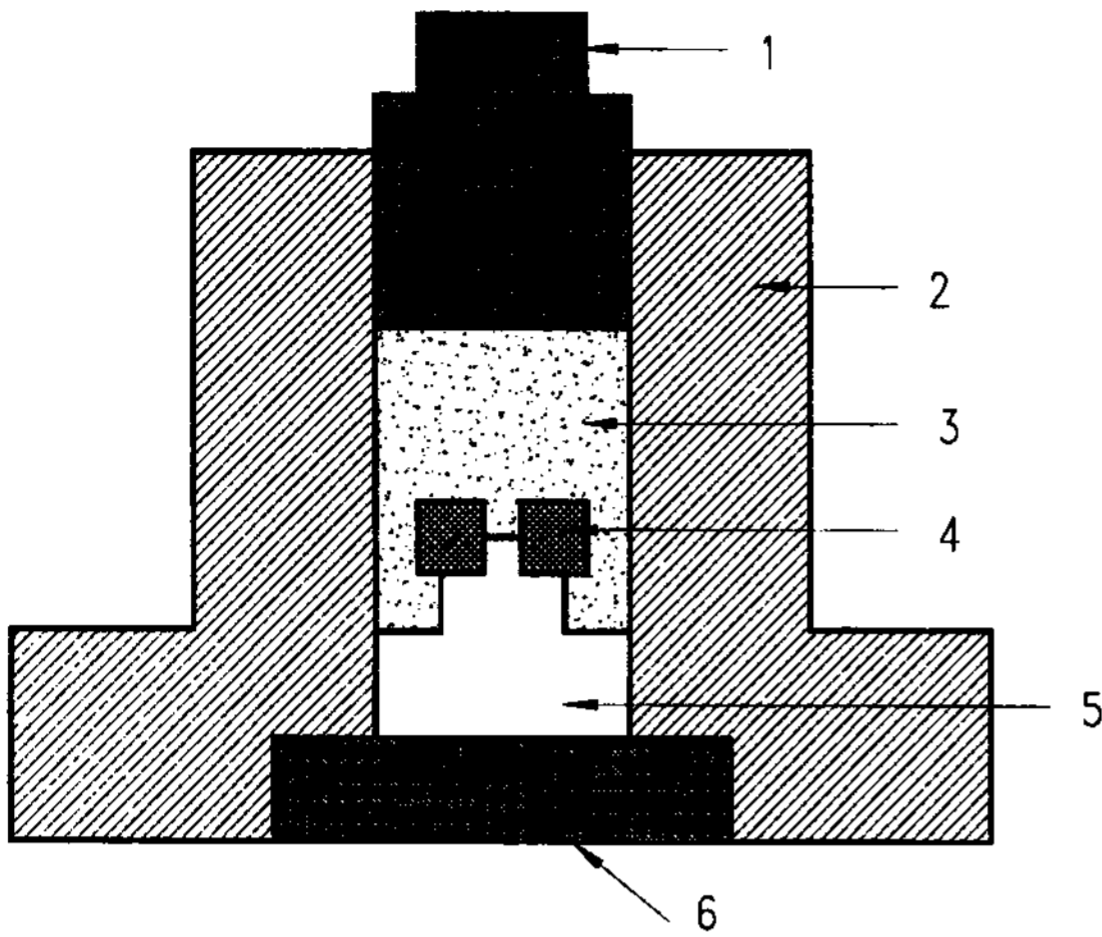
Schematic diagram of squeeze casting mold 1. punch, 2. mold, 3. molten metal, 4. salt core, 5. salt core support, 6. bottom mold.
